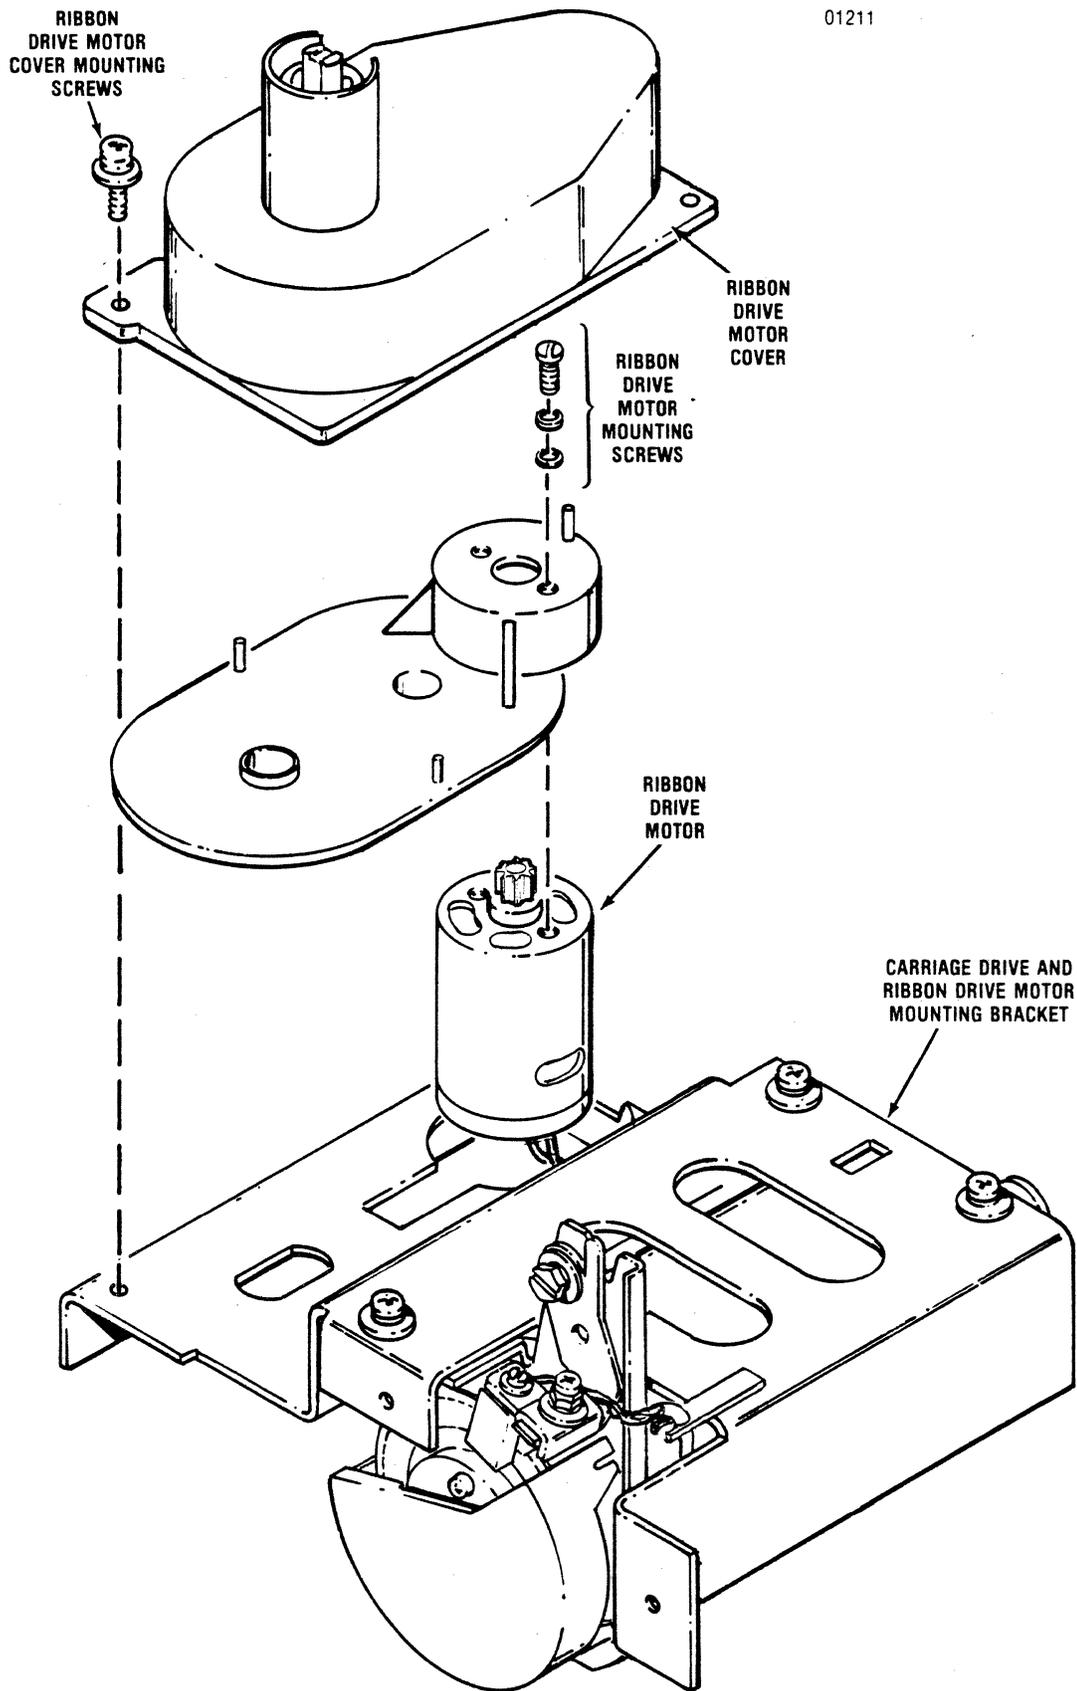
Removal/Replacement, Ribbon Drive Motor
